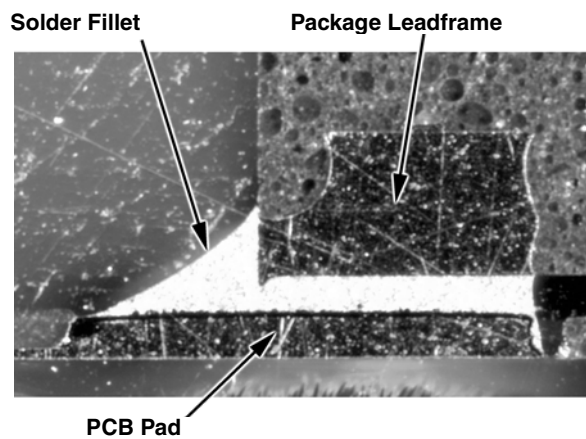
X-section of NO Pull Back Solder Joint with fillet
